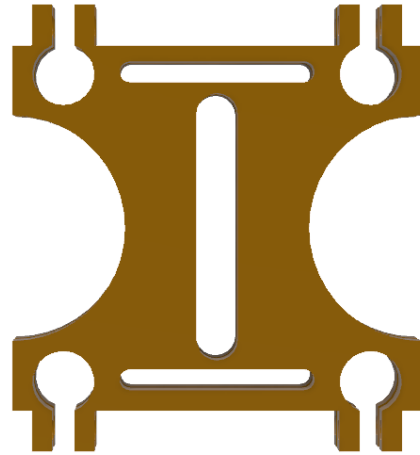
Fixed Nut Plate with 4mm Gap at the Centre for the Driveshaft, Screw Holes at the Top and Bottom for M2 tightening, and
